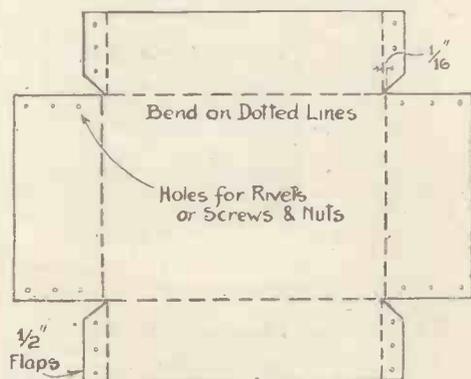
Layout of an ordinary metal chassis. Before bending. Where dotted it will be bent. Cut out flaps as shown
